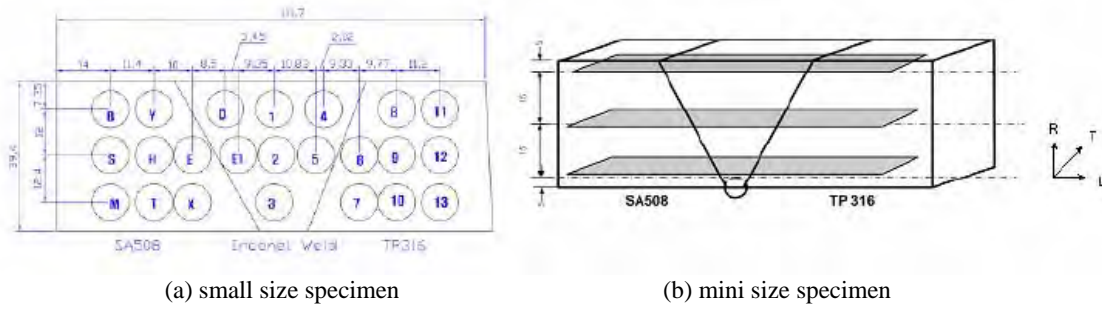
Location of the tensile specimens taken from the dissimilar weld
